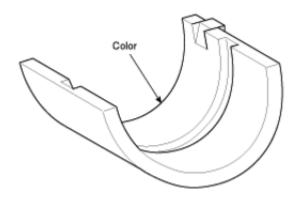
Identifying Crankshaft Bearing Color Courtesy of HYUNDAI MOTOR CO.
